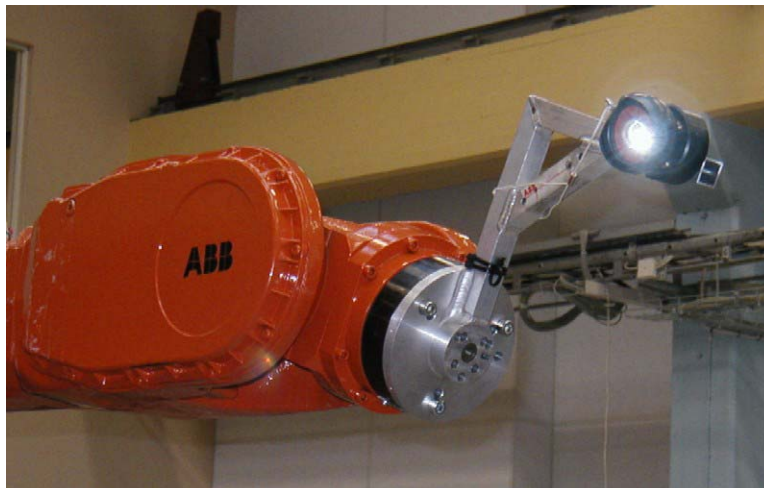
Leica cat's eye retroreflector mounted on robot tool flange.
